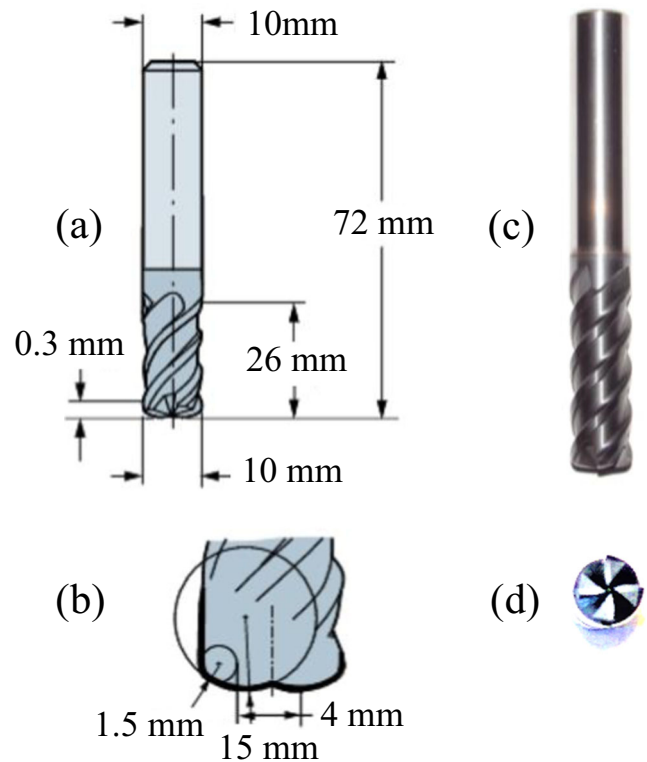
End mill code R215.H4-10050DAC03H 1610 from Sandvik®: a dimensions; b double nose detail; c peripheral edges; d frontal edges
